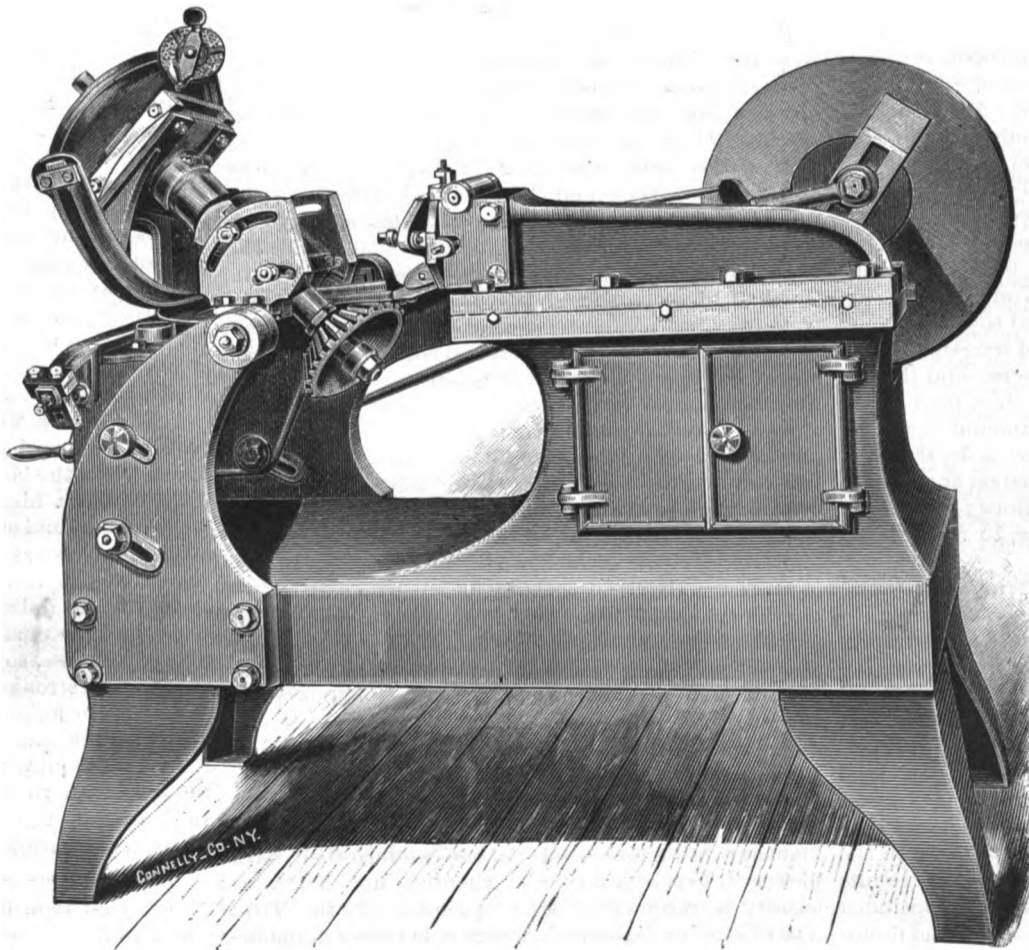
BILGRAM'S BEVEL GEAR CUTTER.
